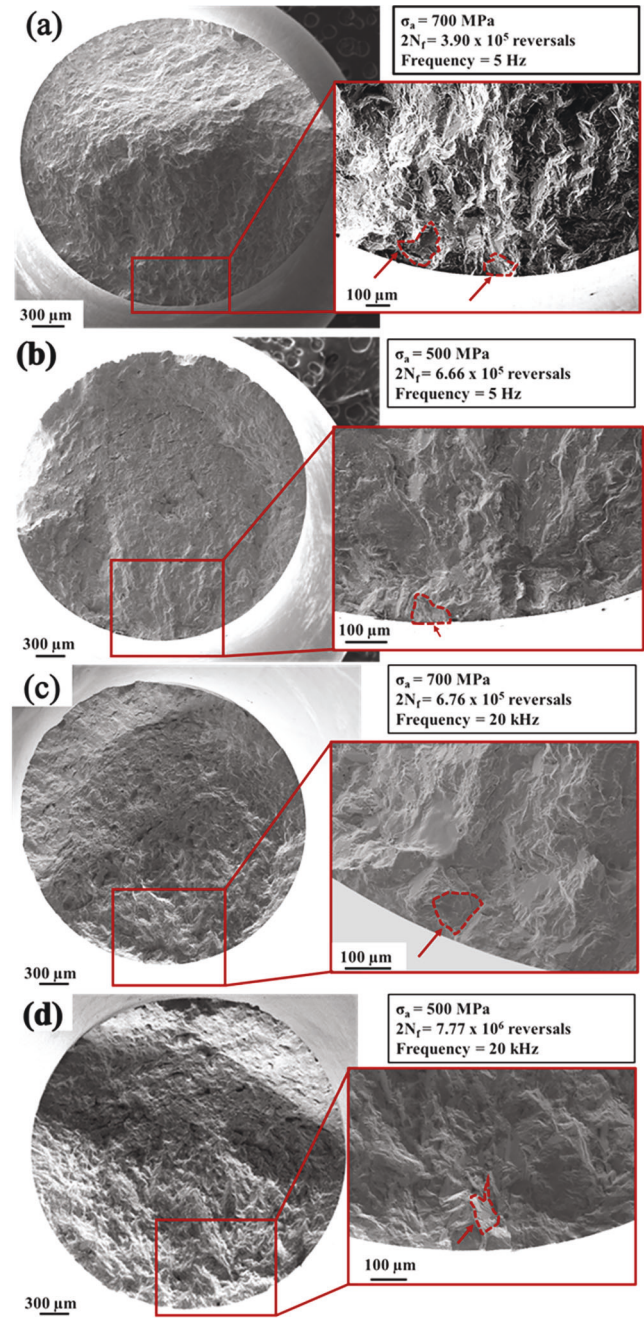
Representative fracture surfaces of diagonal LB-PBF IN718 samples tested under both conventional and ultrasonic loading conditions. The specimens in (a) and (b) were tested at a frequency of 5 Hz. The specimens in (c) and (d) were tested at a frequency of 20 kHz.
